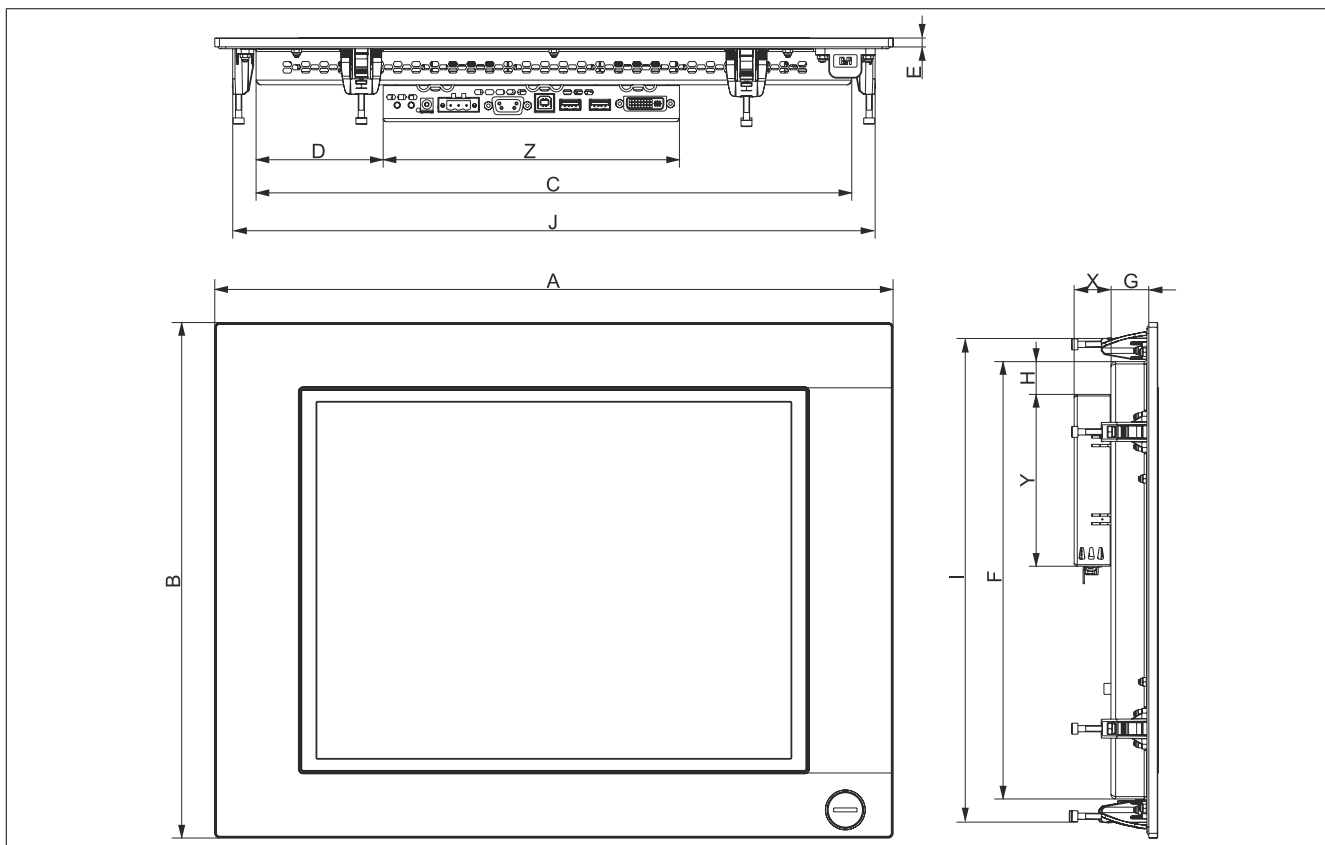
Automation Panel 1000 with clamping blocks - Dimensions
